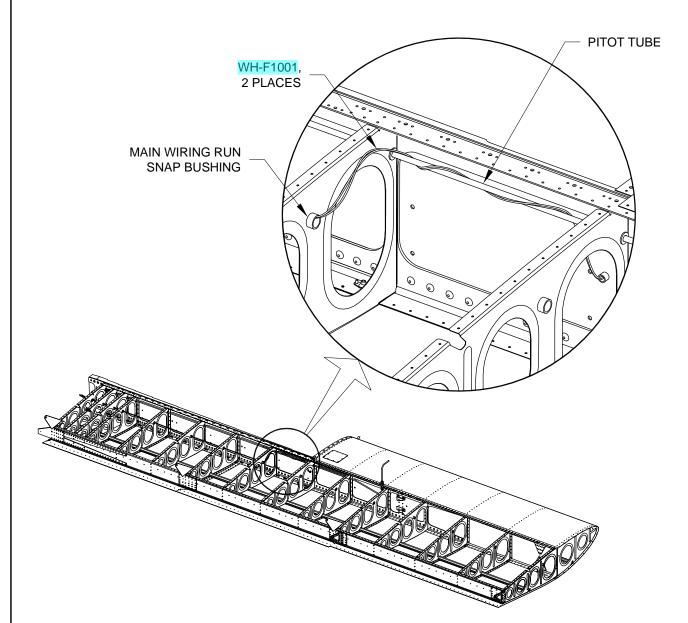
ROUTING WIRES INTO THE MAIN WING WIRE RUN
